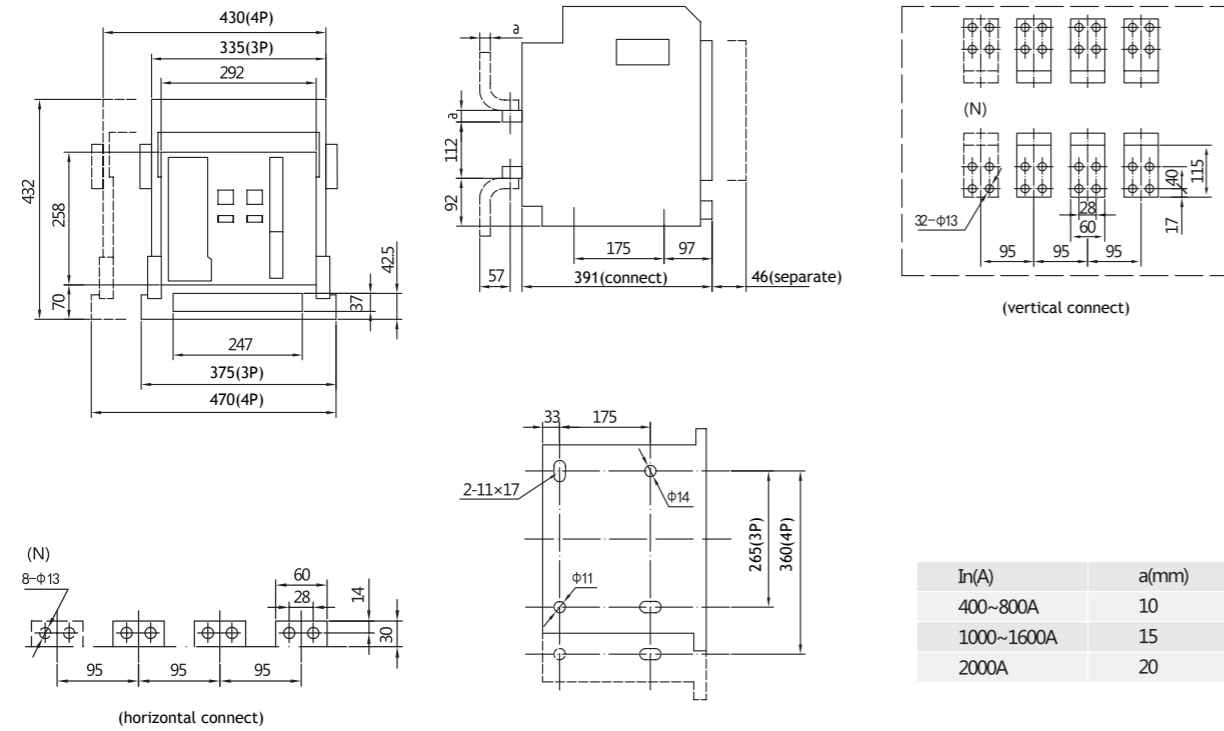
RDSW6-3200/3、3200/4 drawer type install and shape dimension
